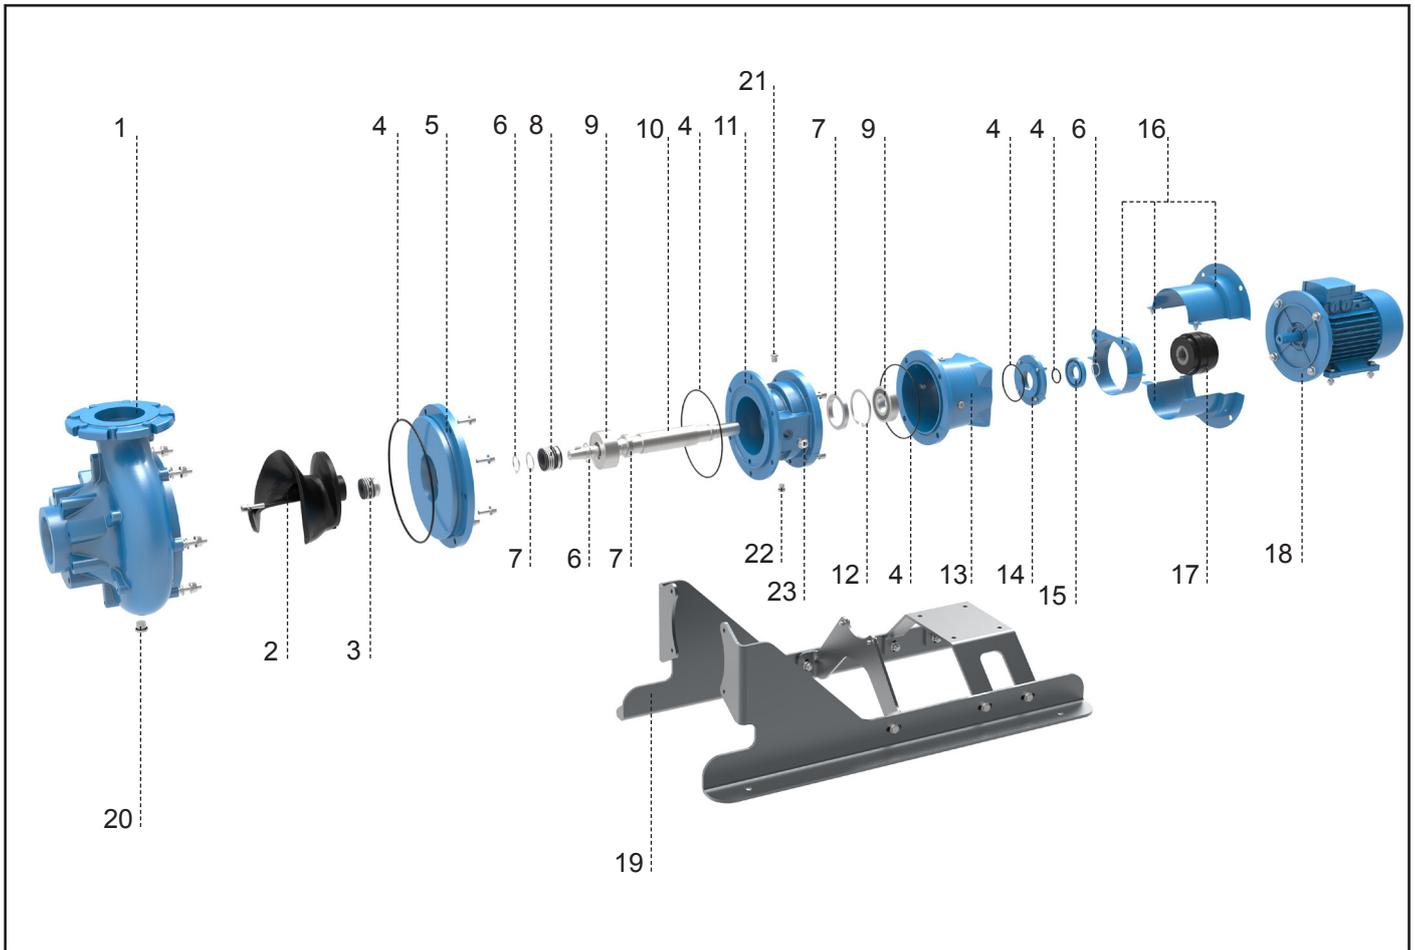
Verderhus® Exploded View - Long - Coupled Pump (generic view)
